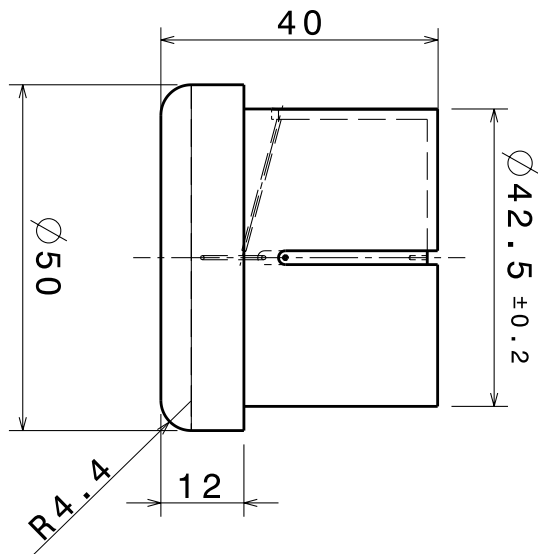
Sample geometry. The left side faces the flow; the right thinner side is used to position the thermocouples and to connect to the cooled support
